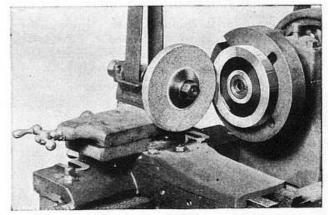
Grinding a Slitting Cutter on an 18-inch Lathe
